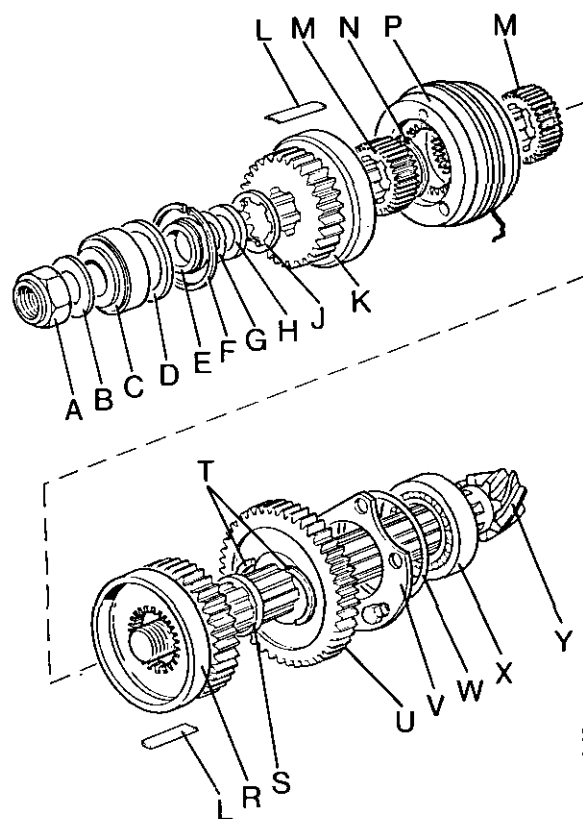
BEVEL PINION SHAFT ASSEMBLY
